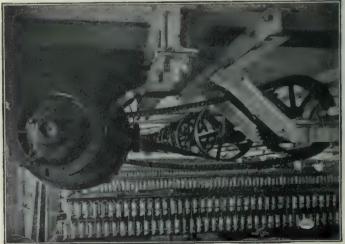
H.P. Lineshaft | Drive from Motor in Flax Spinning Mill, by Silent Chain.
